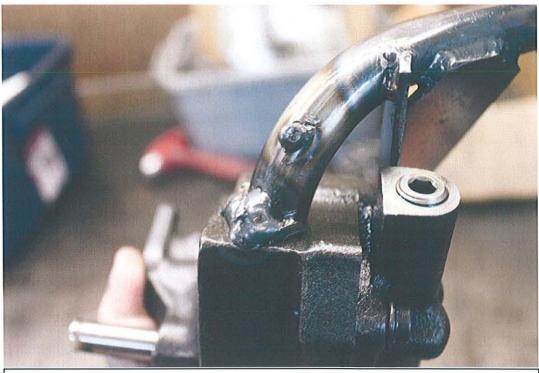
#377R: Oil pump and oil pump pickup tube partially welded interface
